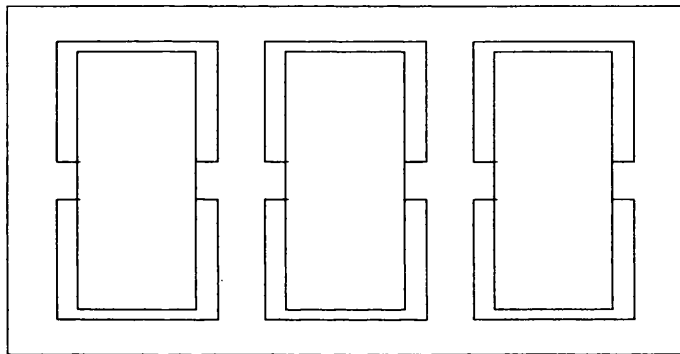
Three-phase shell-type arrangement showing two yokes being removed
